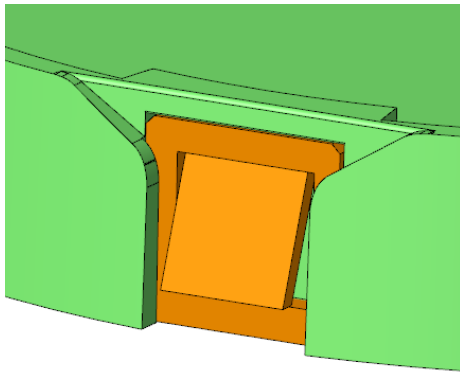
Close up of chassis and insert piece. The chassis is built inwards slightly, and the wide chamfers on the chassis introduce guiding of the cover during installation. (Otto Reerslev)
